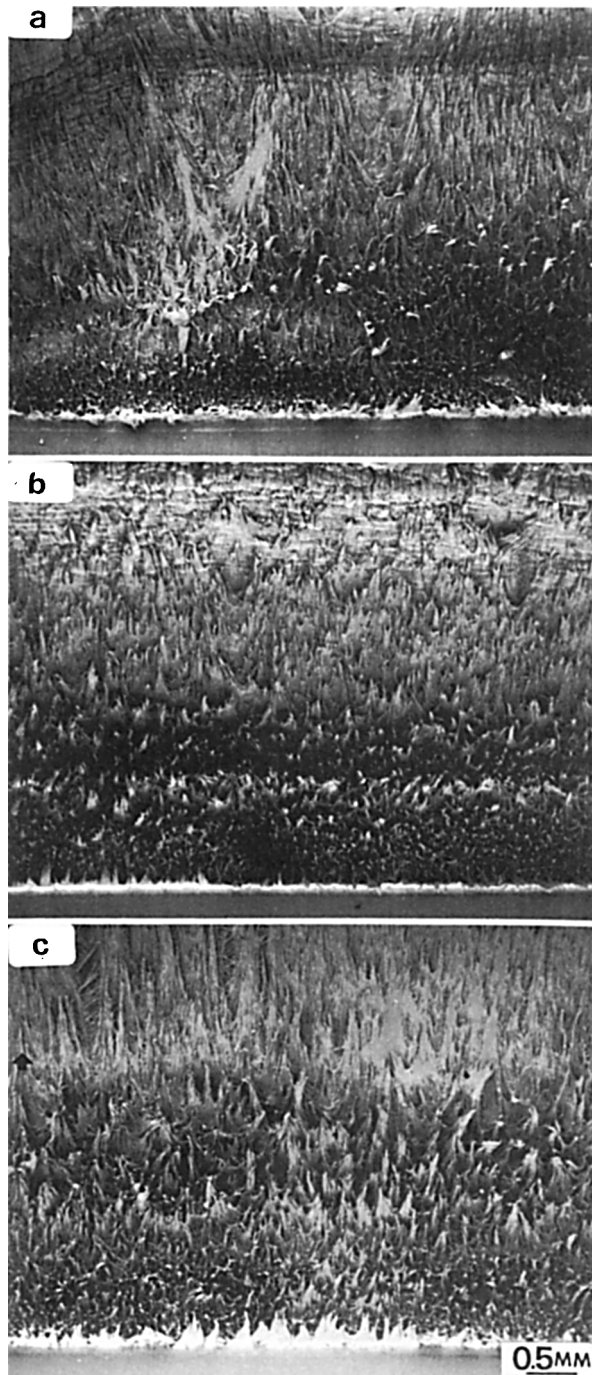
Fibrils on fractured surface: (a,b) weld at 1.61 MPa; (c) pipe.
